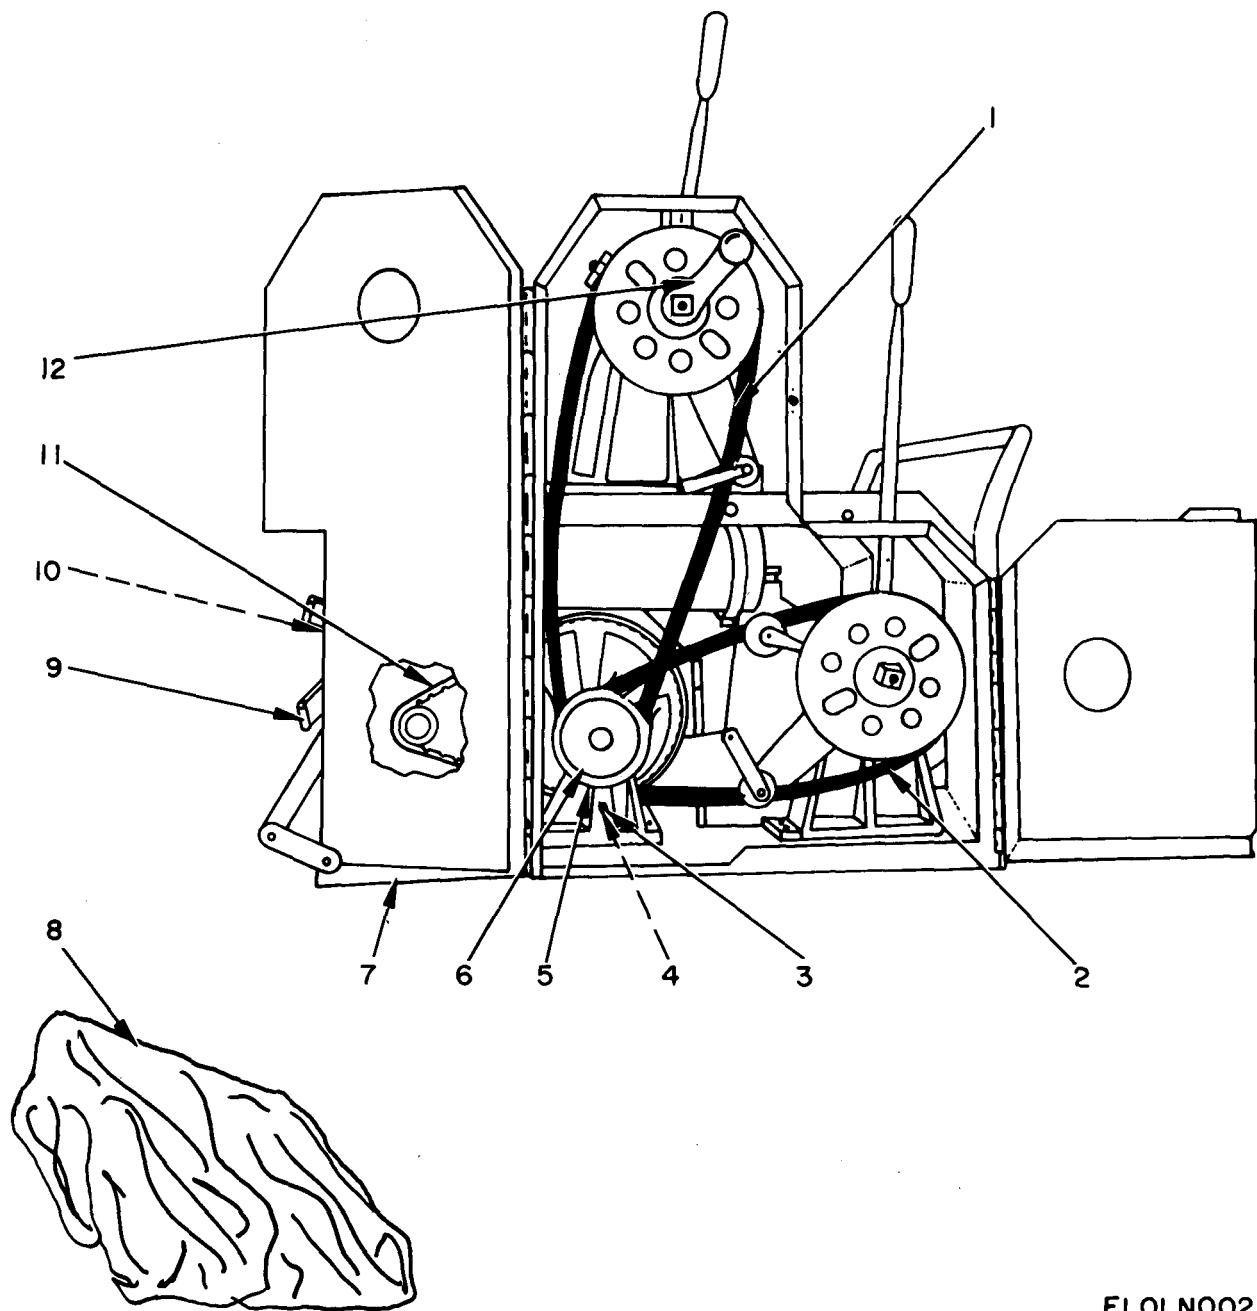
Reeling Machine, Cable, Engine Driven RL-207/G and RL-207A/G.
